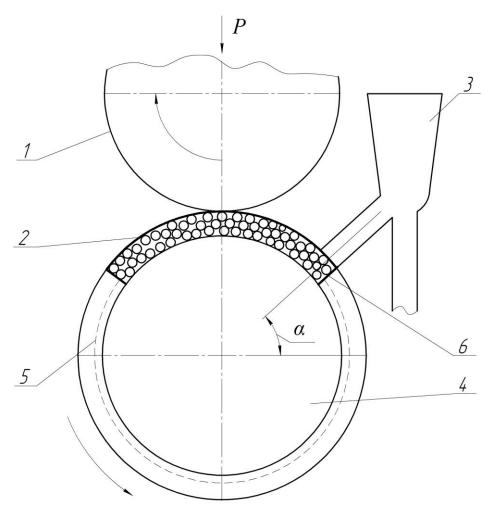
Welding scheme for metal powder: 1 – roller-electrode;
